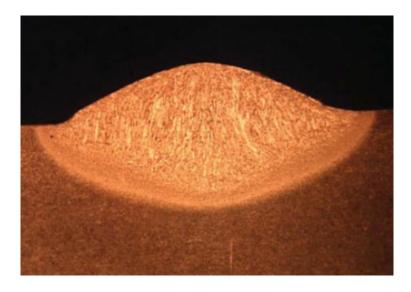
Etched welding surface specimen. Available from Hobart Institute of Welding Technology (2010)
